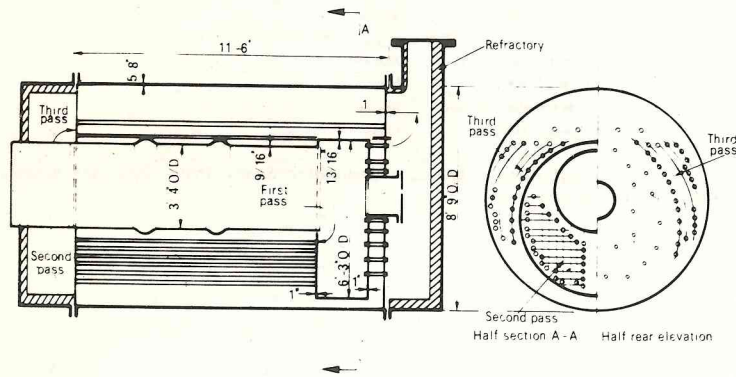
Wet back 'Steambloc' Type 480 boiler
